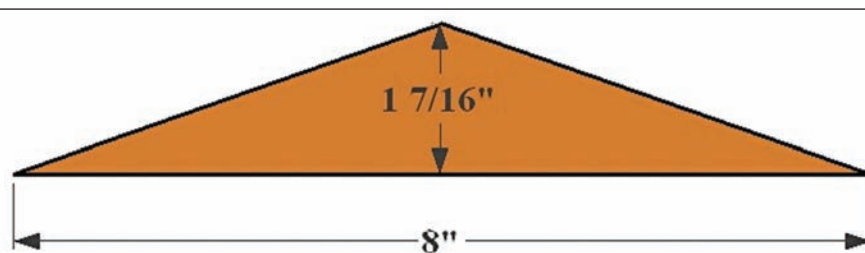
Dimensions for assembly jigs 2 and 3.
